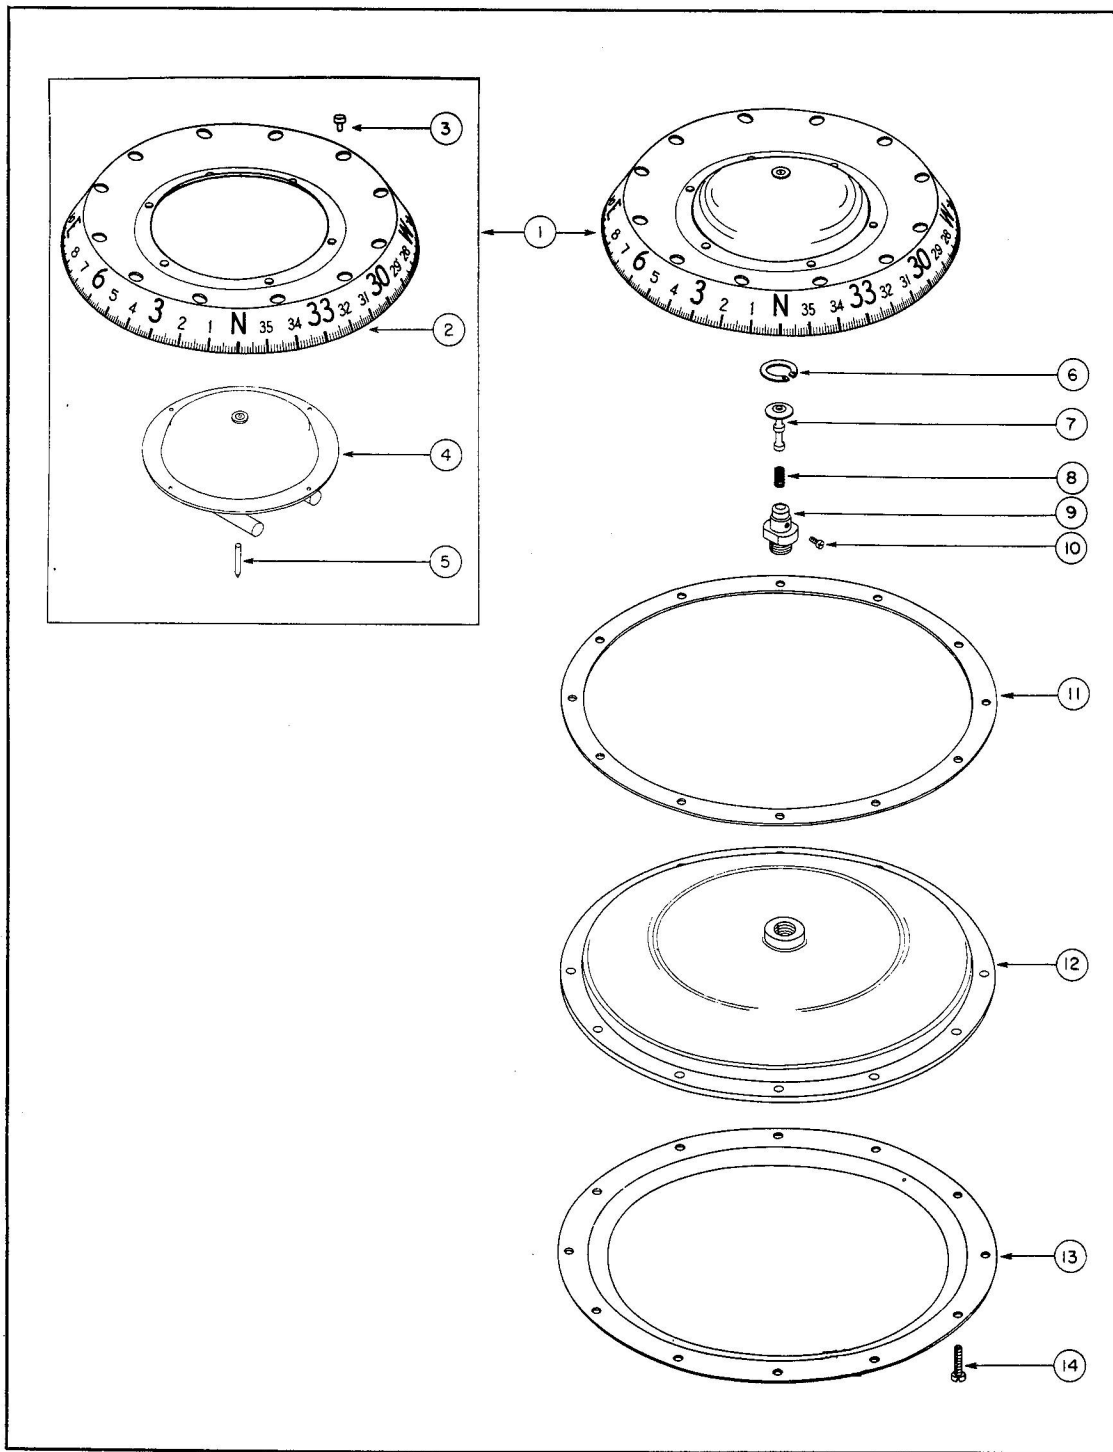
Exploded View - Compass - Card and Float Assembly and Attaching Parts -
